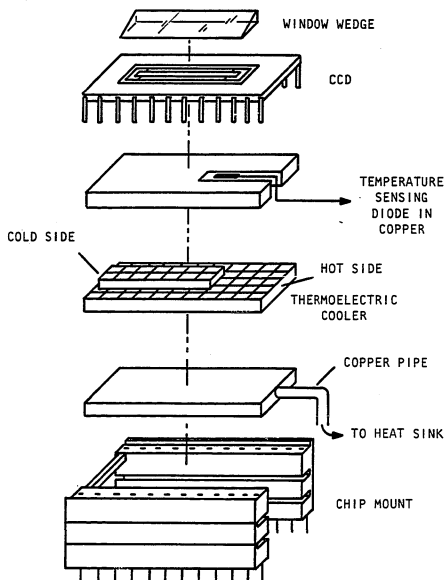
CCD, optical wedge, and thermoelectric cooler assembly.
